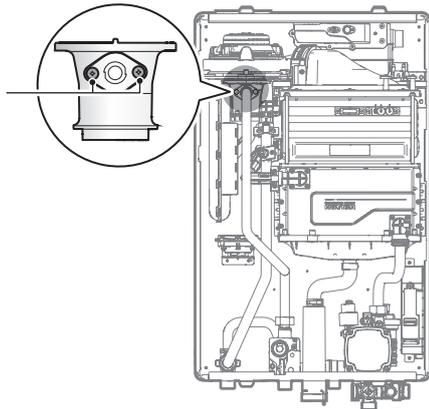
Access to Gas Orifice in Fan Assembly
